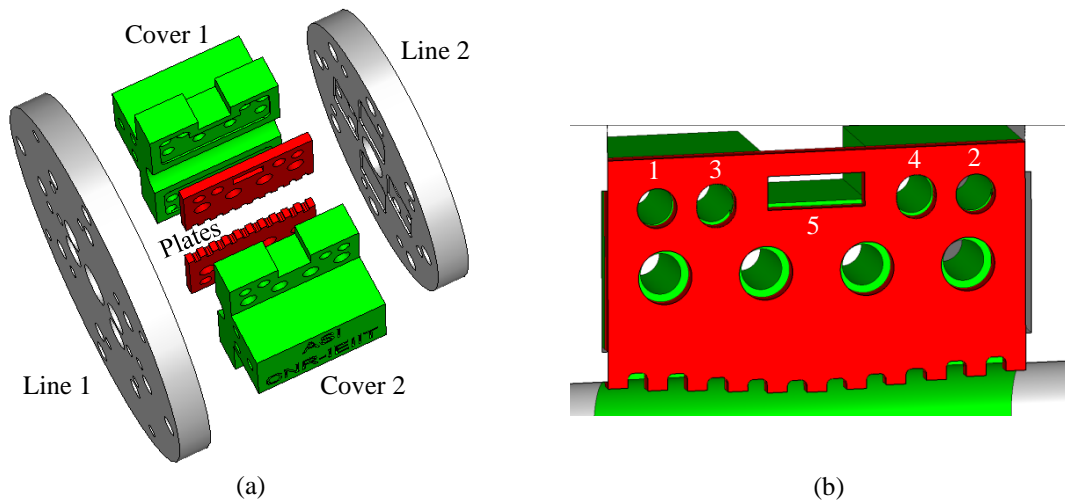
Split-block mechanical layout of the polarizer. (a) 3D exploded view. (b) Detailed view of the alignment holes configuration used in the assembly. 1, 2: nominal alignment holes. 3, 4: elliptical holes for fine tuning. 5: housing slot for the gauge blocks.
